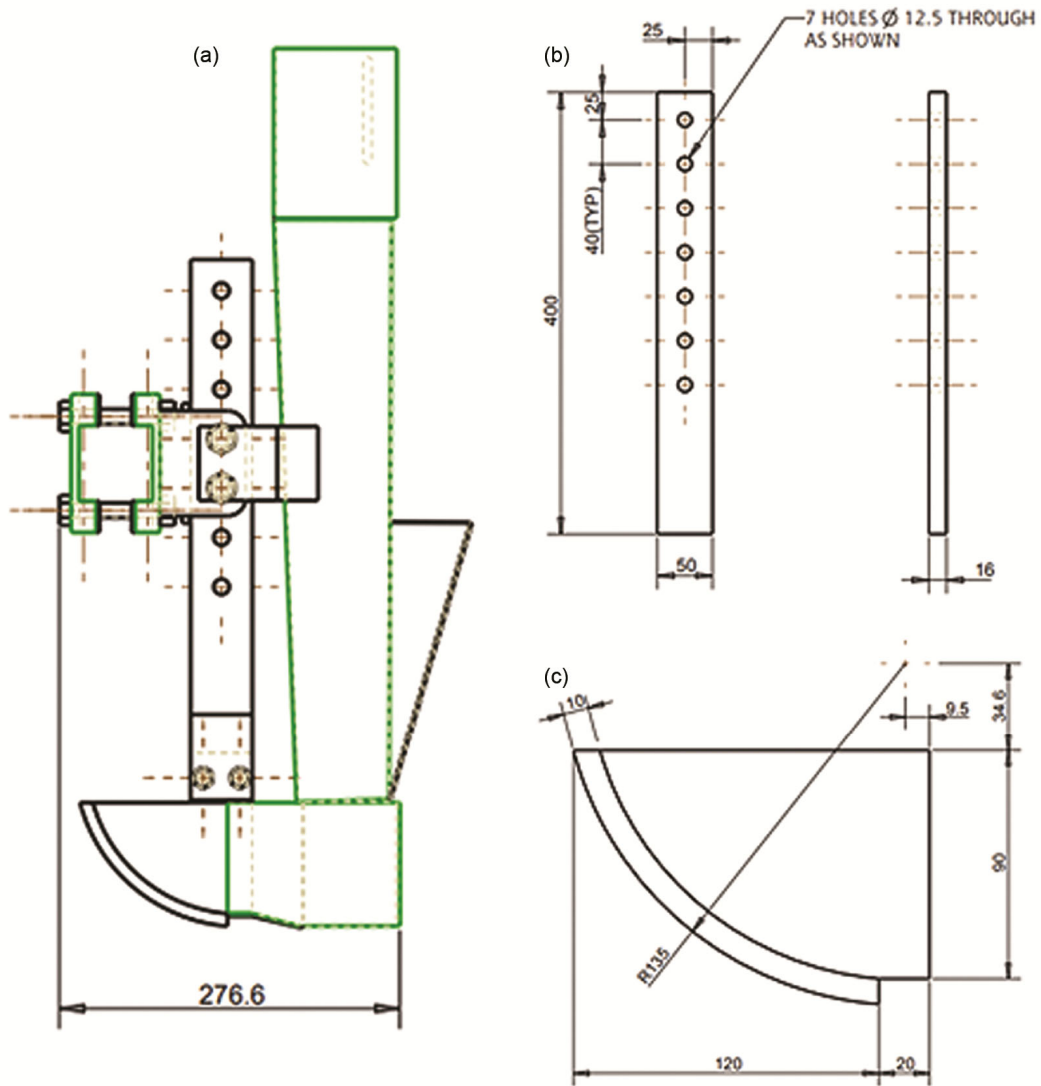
CAD drawing of furrow opener of the planter (a) furrow opener assembly, (b) furrow opener support (c) runner type furrow opener.
